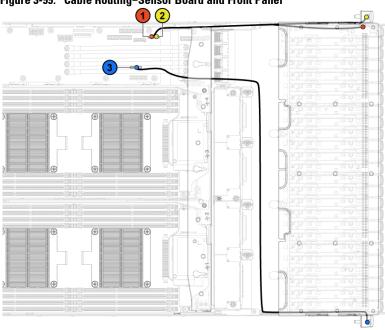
Cable Routing-Sensor Board and Front Panel
